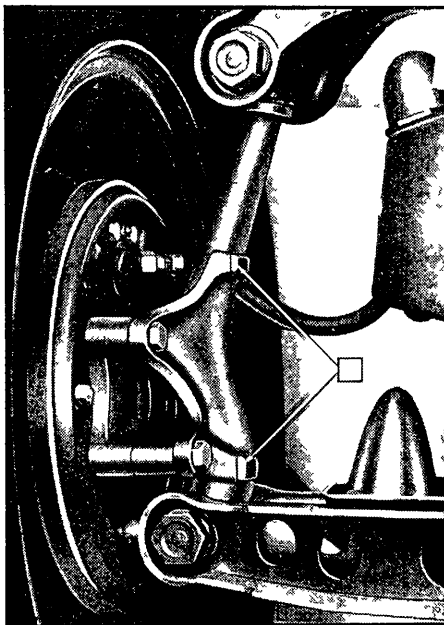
Gauge points (1) on steering knuckle pin to check caster and camber. 1950-51 Statesman and Ambassador
